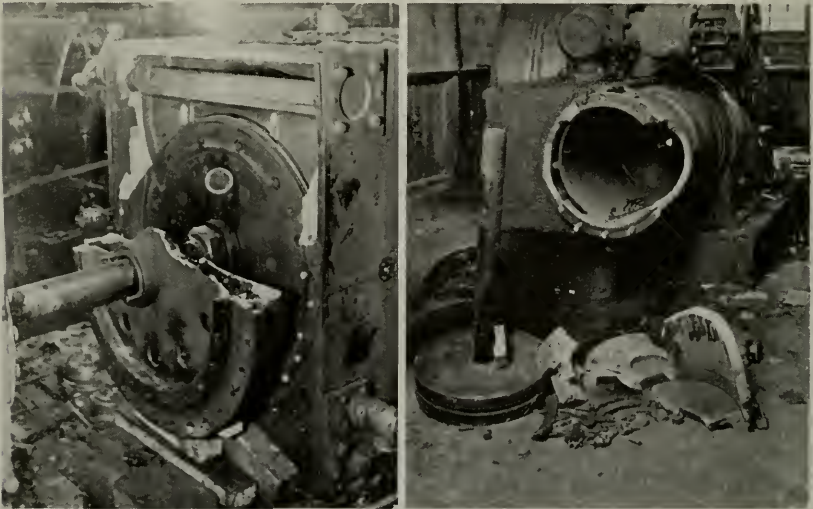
(Left) the result of a connecting rod crack. Figure 3—(Right) the result of a failure in the threads on the piston rod just inside the crosshead.
